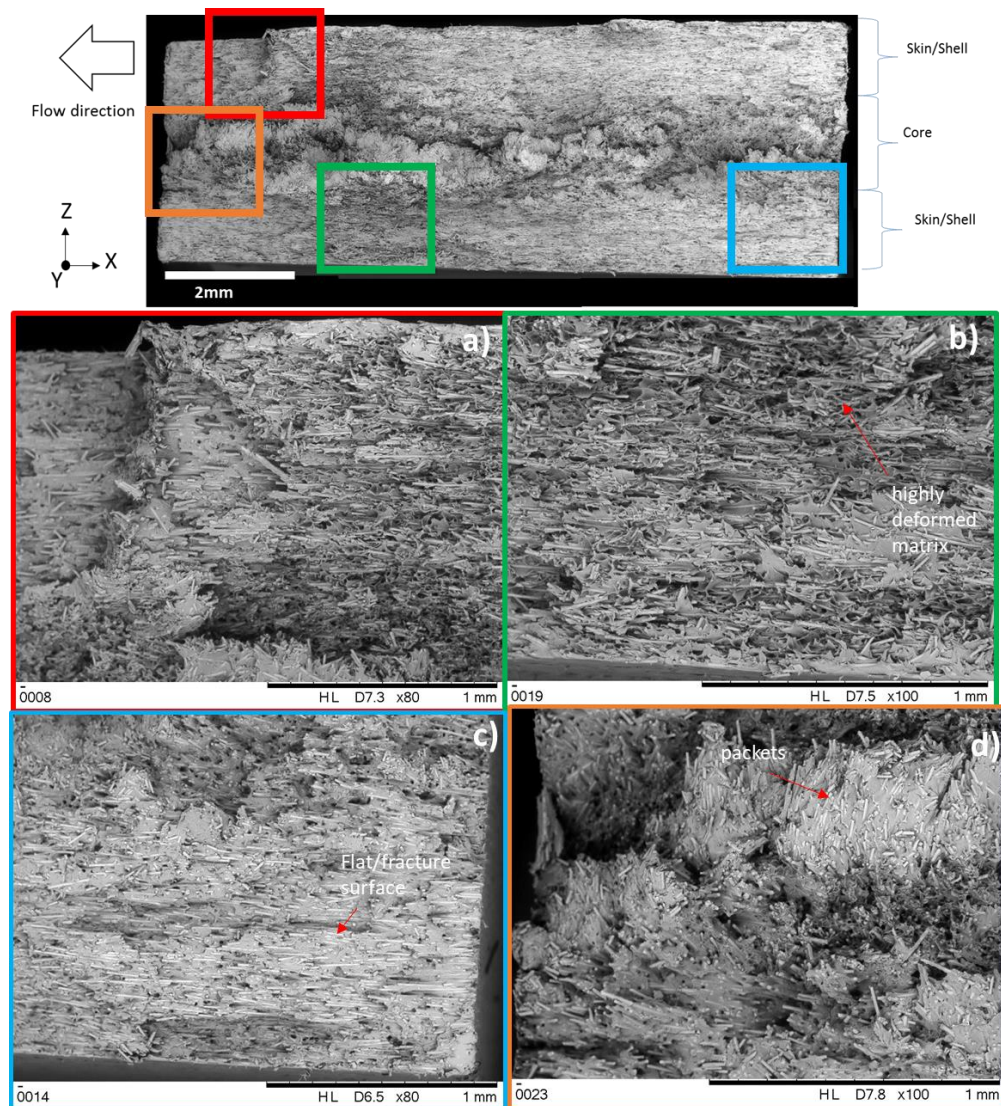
Fracture surface of 90° reference specimen tested in fatigue R=-1 and close-up images. $V_f=30\%$.
